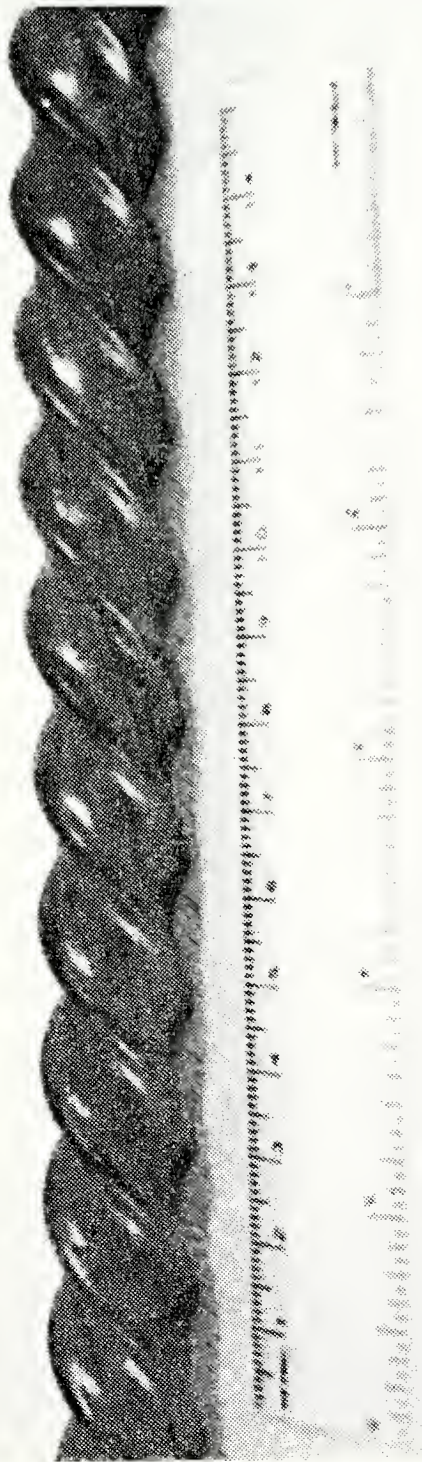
Photograph of High Pitch TURBOTEC Tube (Tube No. T-1)
